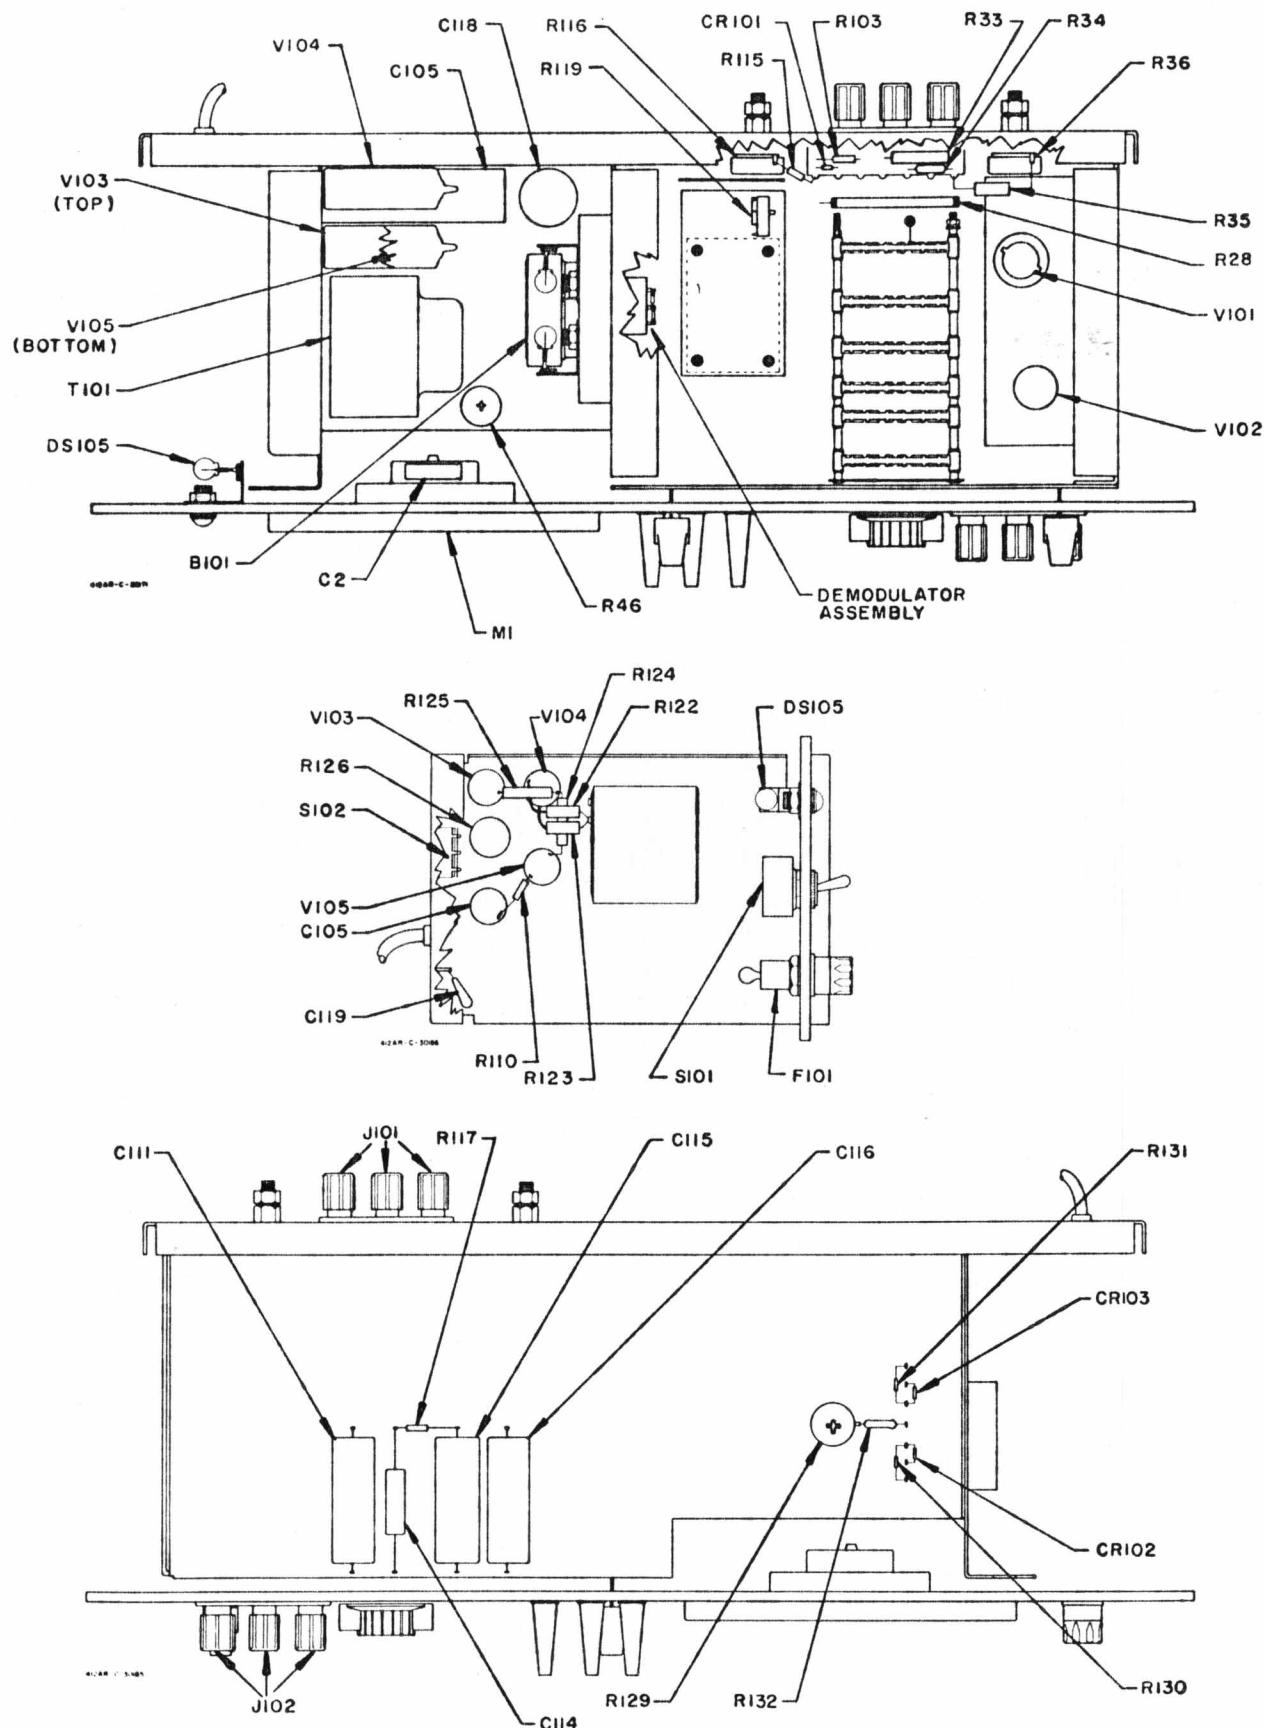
Location of Chassis Mounted Parts, Rack Model
